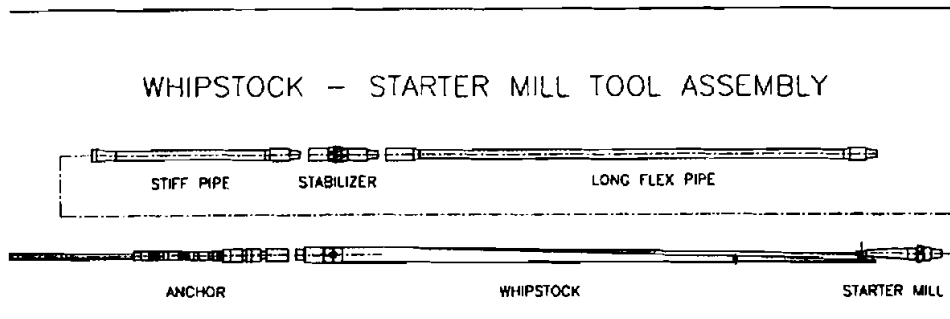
CT Window Mill Assembly for 5½-in. Casing
